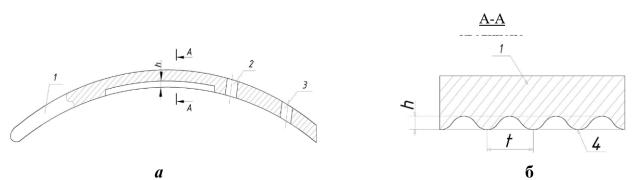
Sewing machine bobbin case hook thread tension adjuster.
